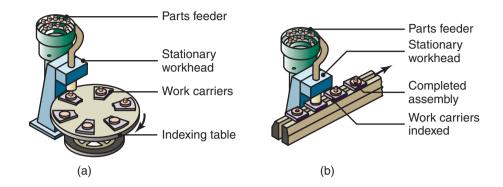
Transfer systems for automated assembly: (a) rotary indexing machine and (b) in-line indexing machine. *Source:* After G. Boothroyd.
